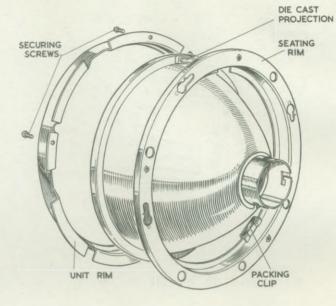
Light Unit assembly for Lucas Headlamp Model F700 Mark VI
